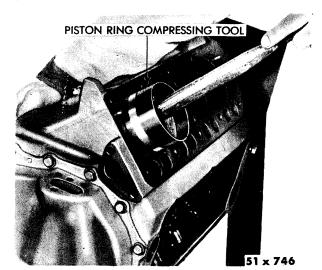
Installing Connecting Rod Piston and Rings (Typical)
